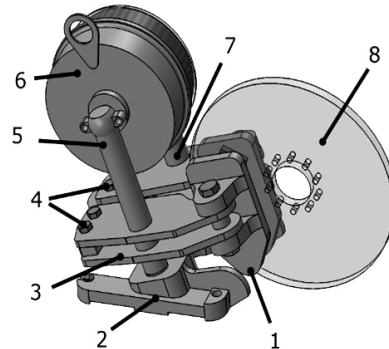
CAD model of caliper disc brake type SIME 45K: 1 – pad, 2 – base, 3 – lever of a lever-cam mechanism, 4 – bolts for gap regulation, 5 – moving pillar, 6 – electromagnet, 7 – fixed pillar, 8 – brake disc (not a brake element)
